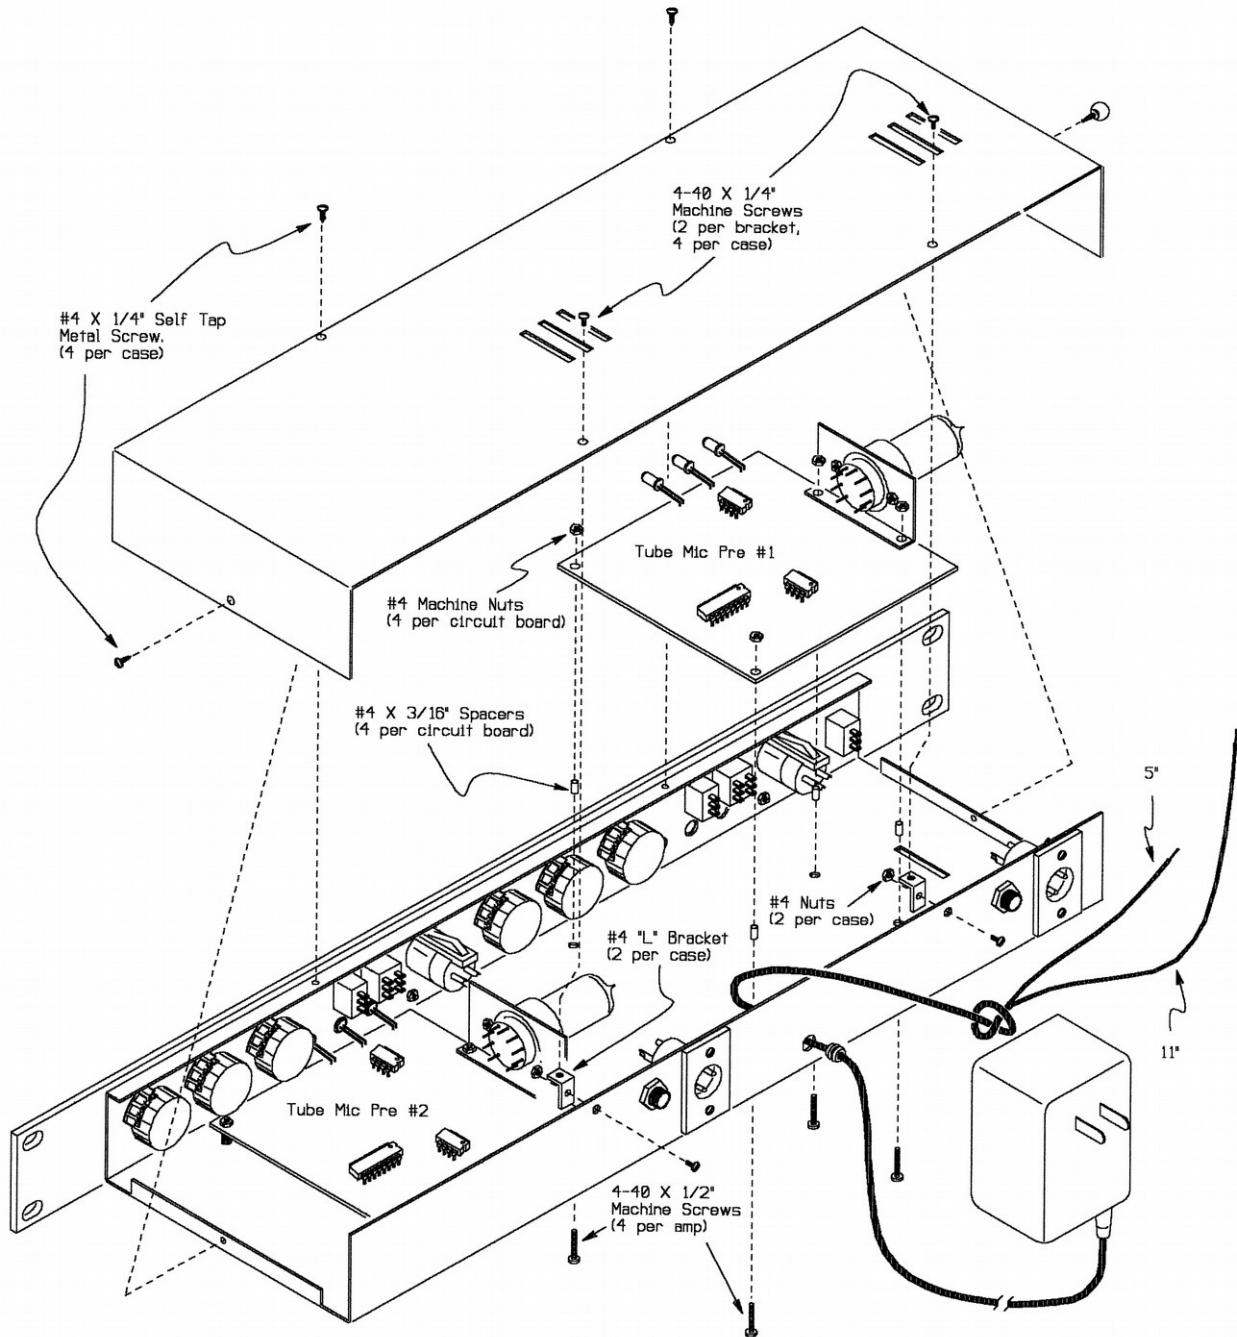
Circuit boards are mounted on 3/16 spacers and LEDs are bent over to engage their front panel holes. Both self tap and machine screws are used to secure the top.
